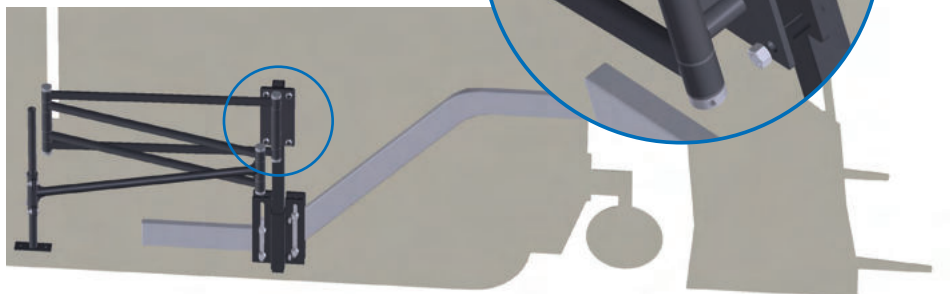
Example of installation of Front Beam Mounting with Front Beam Mounting Bracket
